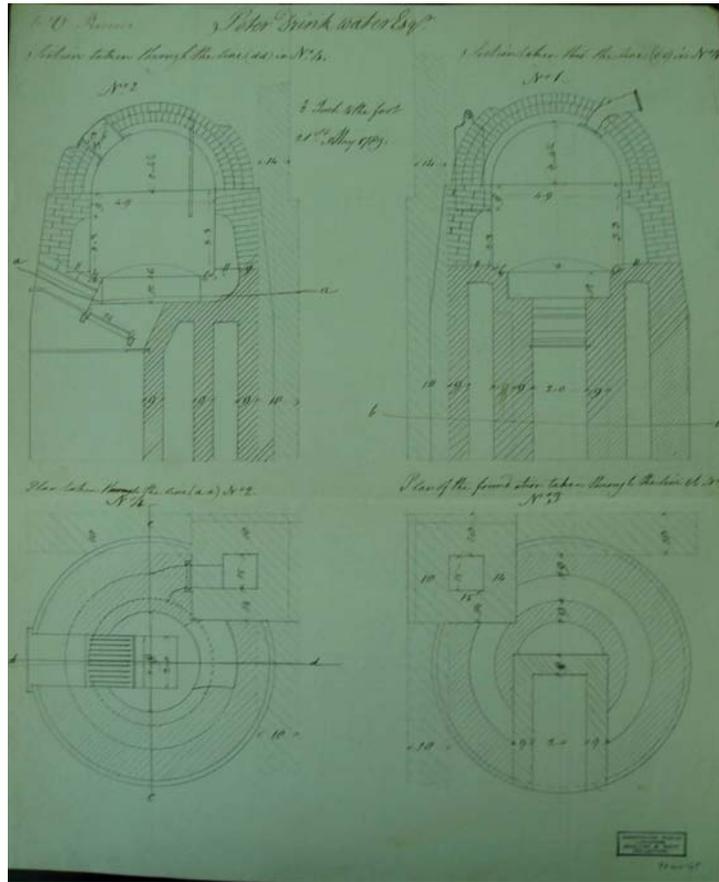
Sketch sections and plans of the 1789 vertical boiler
